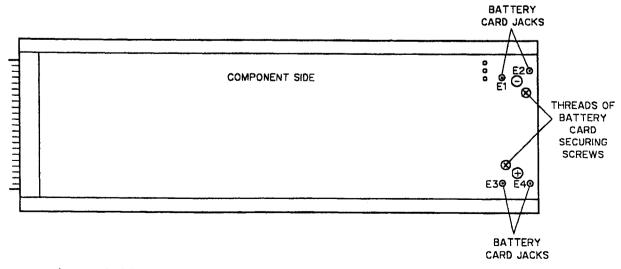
Module AUDIO, Component Side, Battery Card Removed
